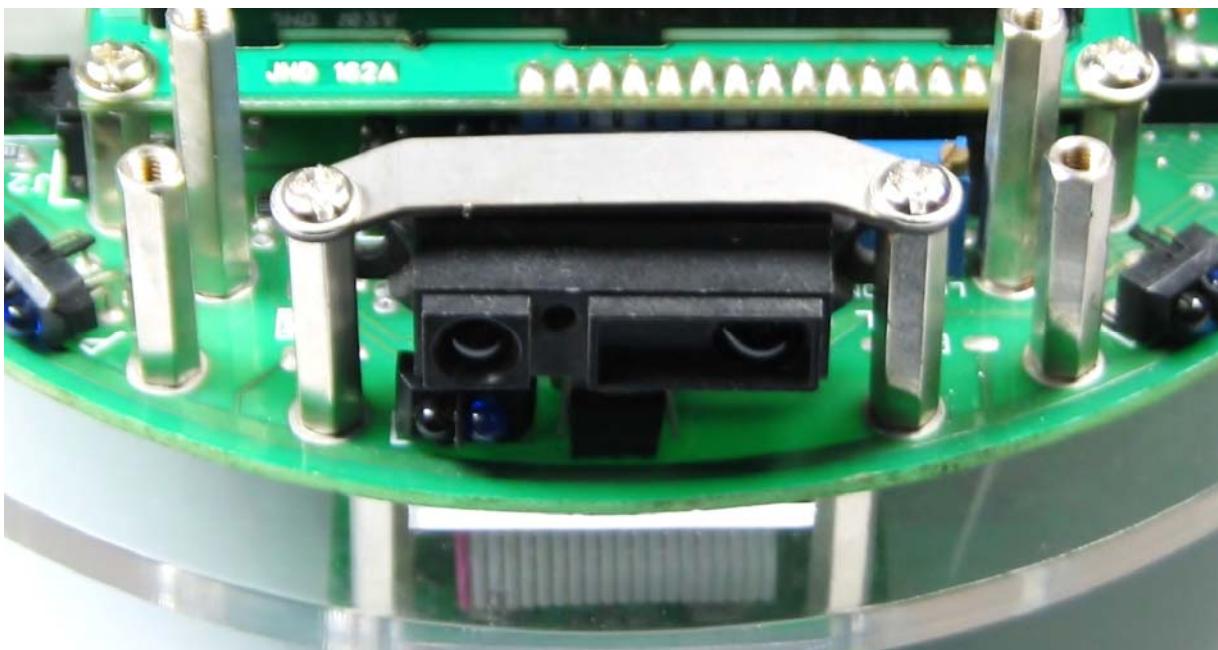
Fitting metal plate on top of the Sharp IR range sensor
